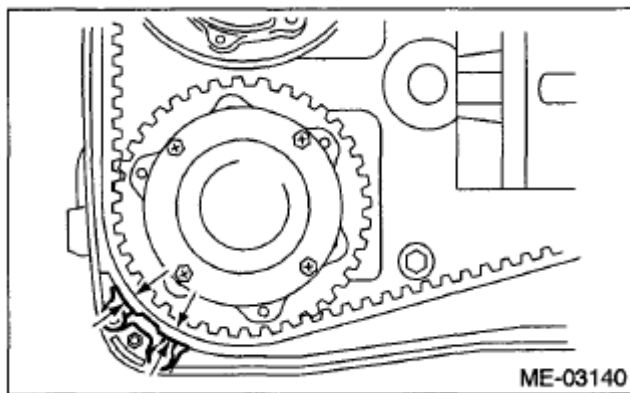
Adjusting Clearance Between Timing Belt And Timing Belt Guide Using Thickness Gauge (4 Of 5)
